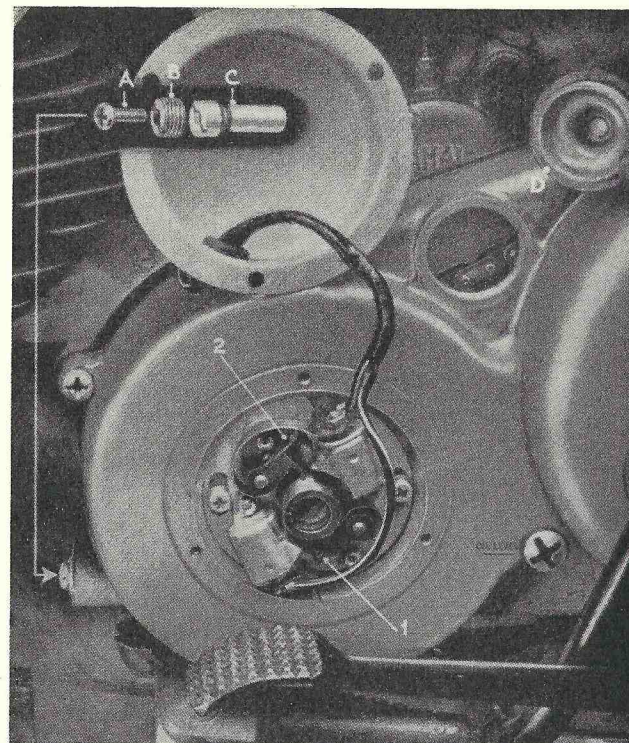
CONTACT BREAKER AND PRIMARY CHAIN ADJUSTER ON LEADER AND ARROW.
